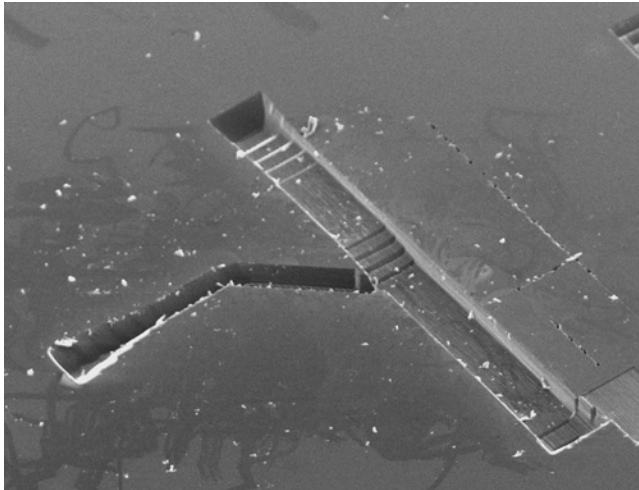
SEM image of a laser micromachined prototype mixer block. Final blocks will have three integrated, corrugated feedhorns, and will be gold plated before assembly.
